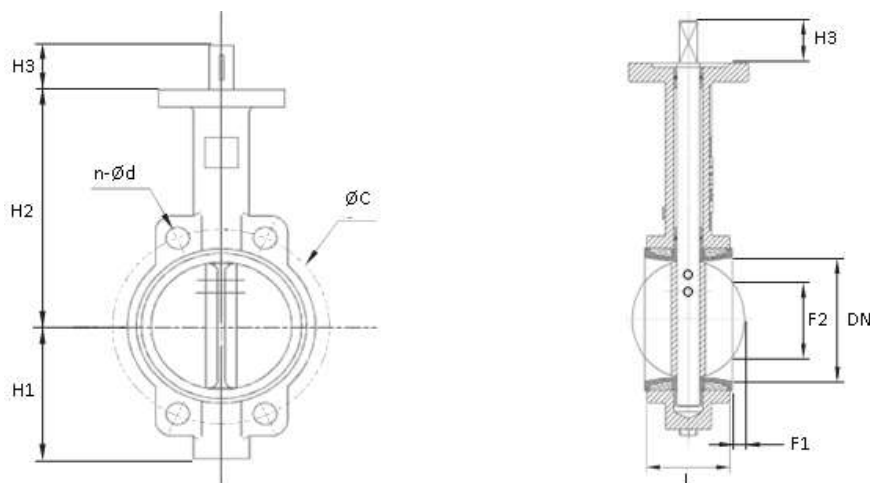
Front view (ØC, n-Ød) and sectional side view (L, F1, F2, H1-H3, DN).
